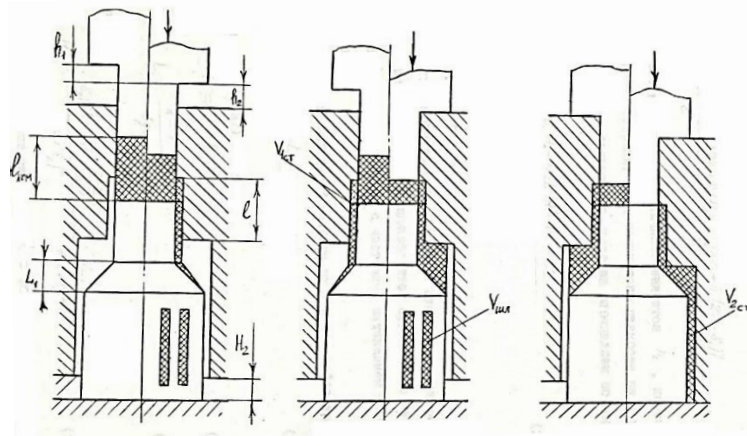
Scheme of movement of metal of a workpiece with a conical cut
